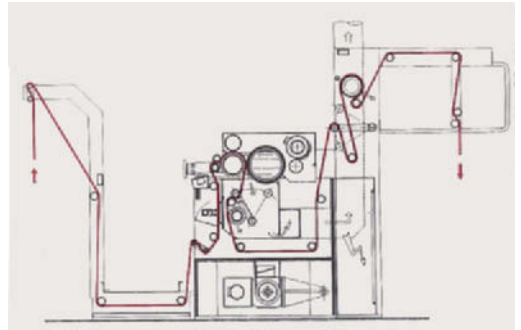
The Sperotto Rimar SM1 sanding machine.
